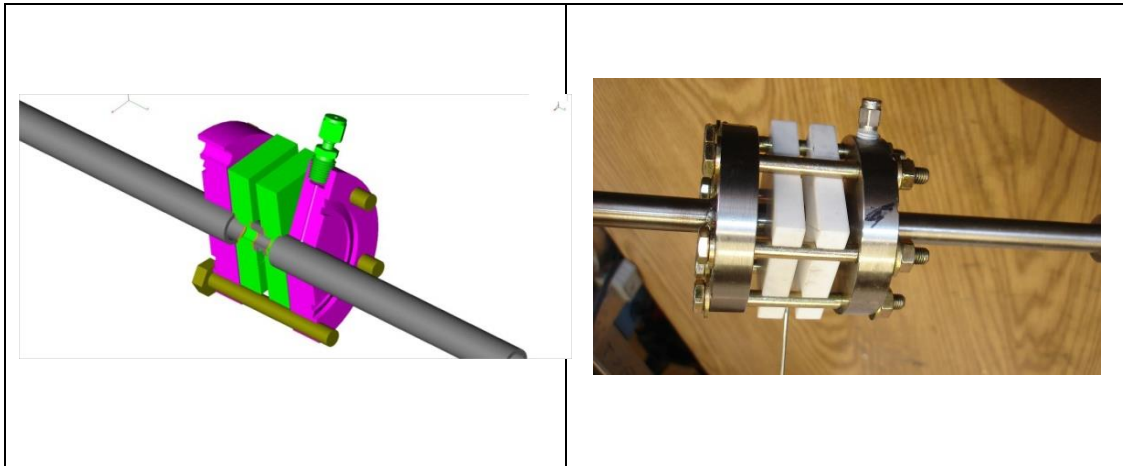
(LEFT) 3 dimensional drawing of 1st-generation ohmic heating prototype. Image provided by Dave Hultman Design. (RIGHT) Fully assembled heater as tested with CHTL system. Image provided by Michael Mohr.
